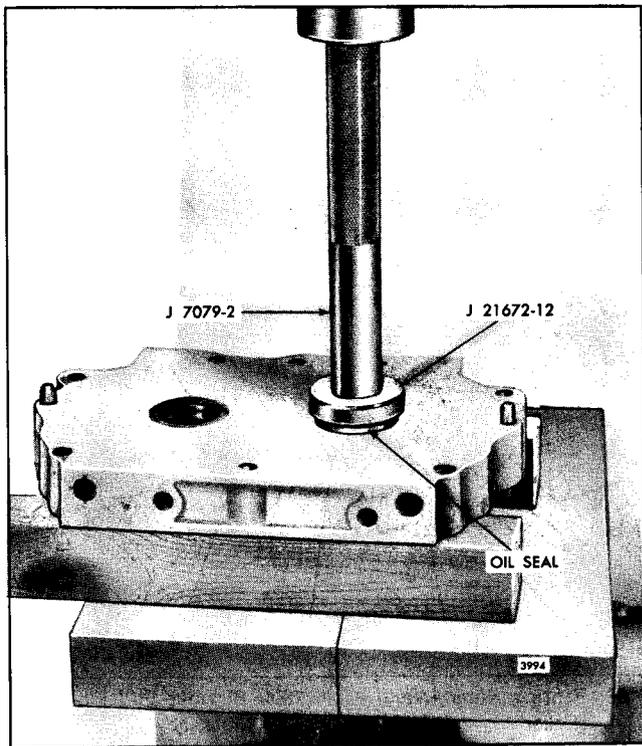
Installing Oil Seal in Rear End Plate (Former Blower)
